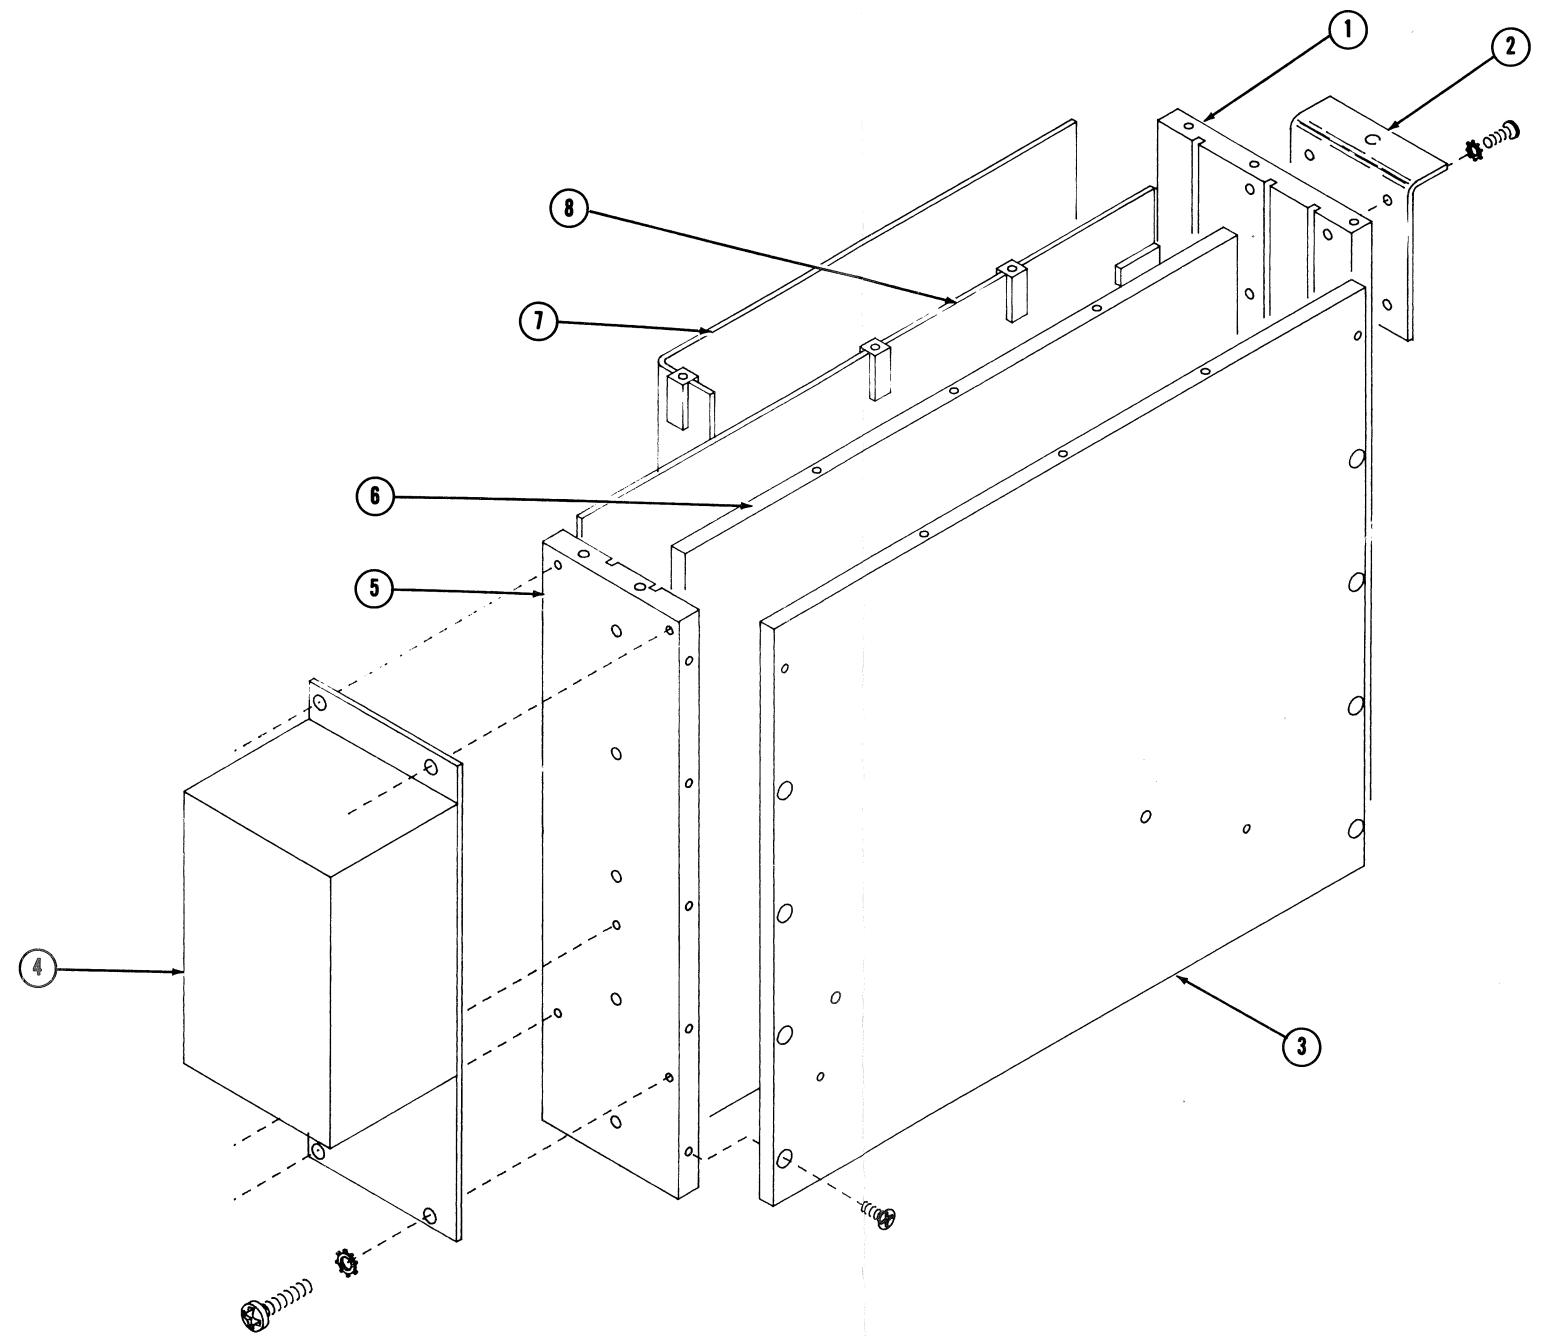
Tracking Generator/Oscillator Assembly.
